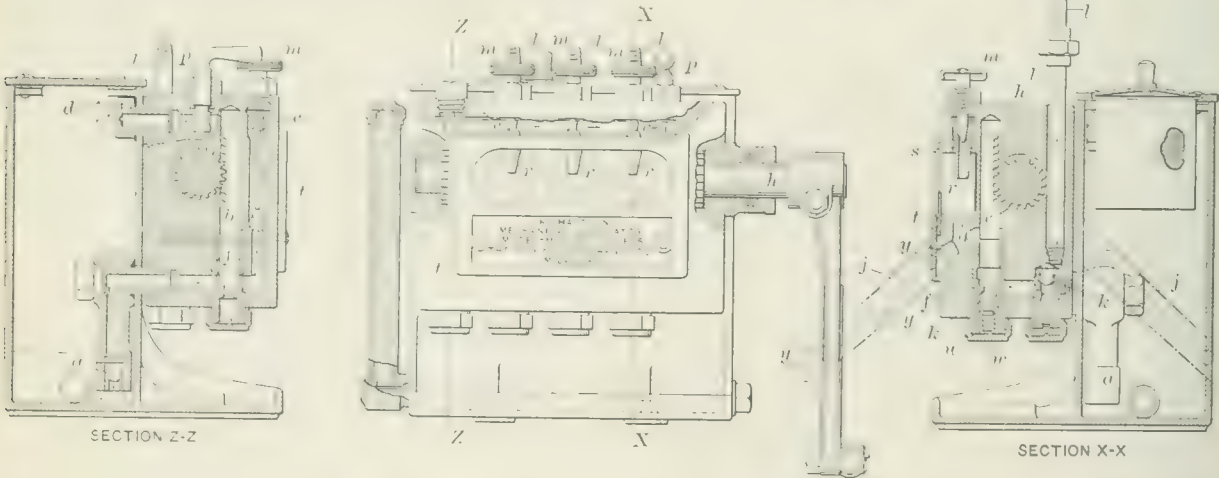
Constructional Details of a Three-Feed Lubricator.
